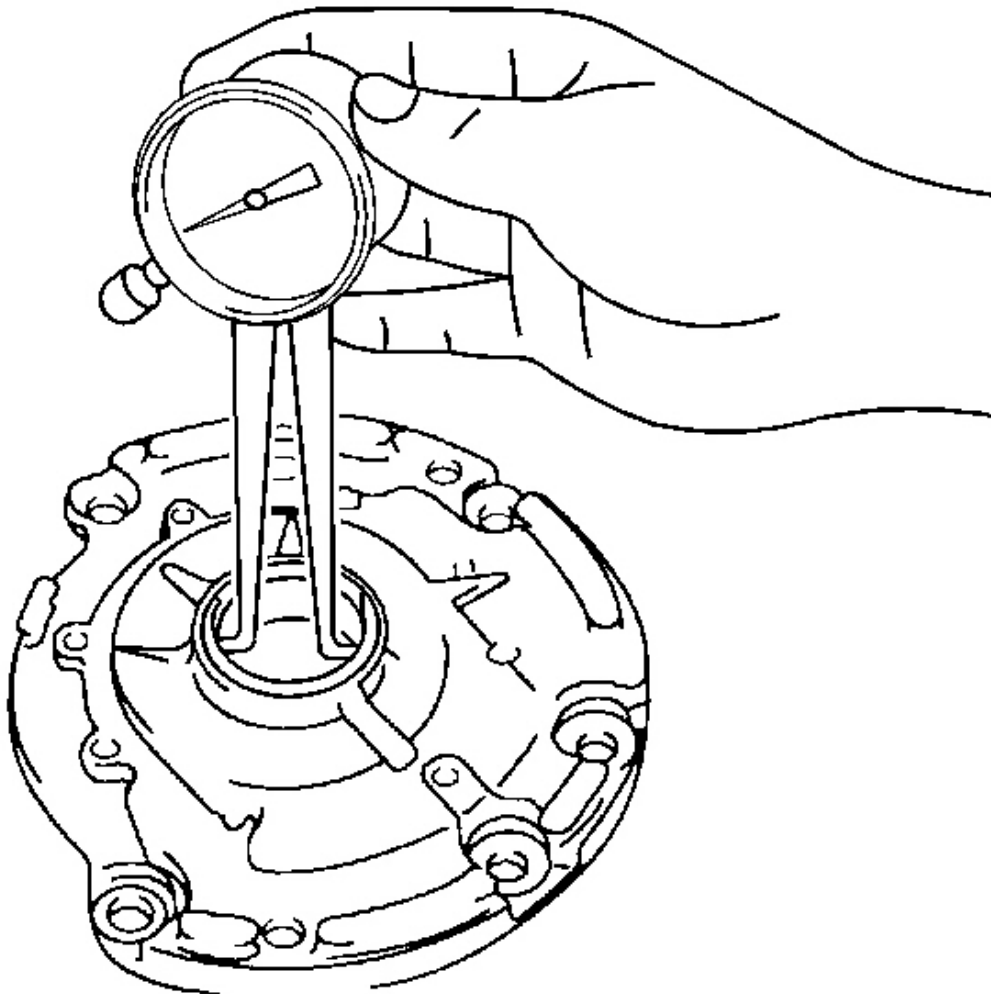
Measuring The Inside Diameter Of Oil Pump Body Bushing Using A Dial Indicator
